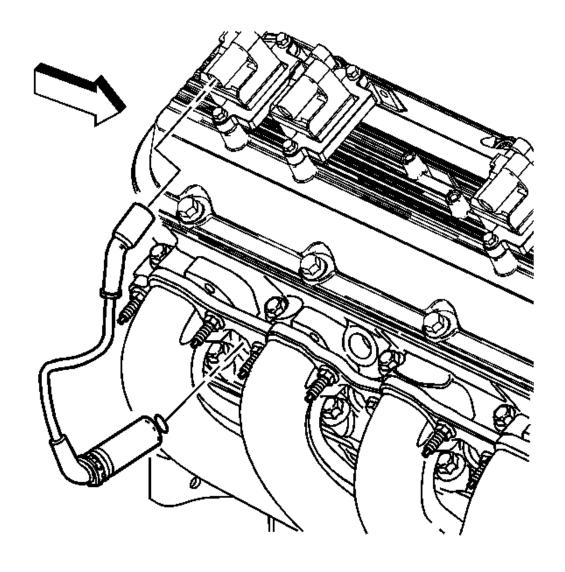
View Of Spark Plug Wires Courtesy of GENERAL MOTORS CORP.
